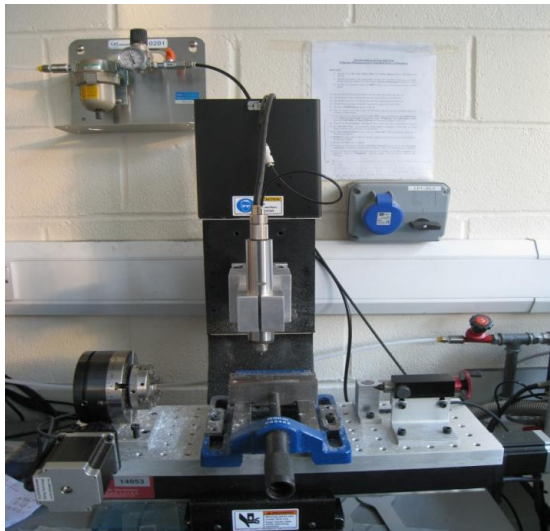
A portable milling CNC machine for machining solar concentrator mould
